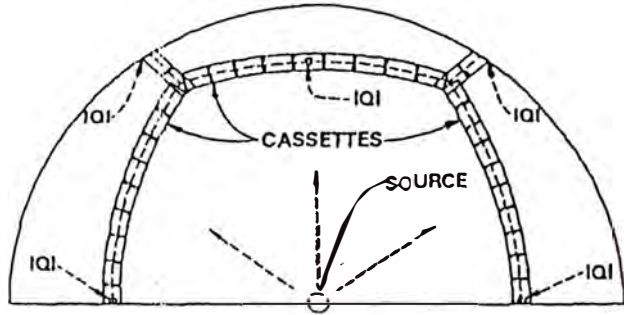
WELDS IN SEGMENTS OF SPHERICAL COMPONENT [T-277.2(b)(5) & T-277.2(b)(5)(b) & T-277.2(b)(6)]
